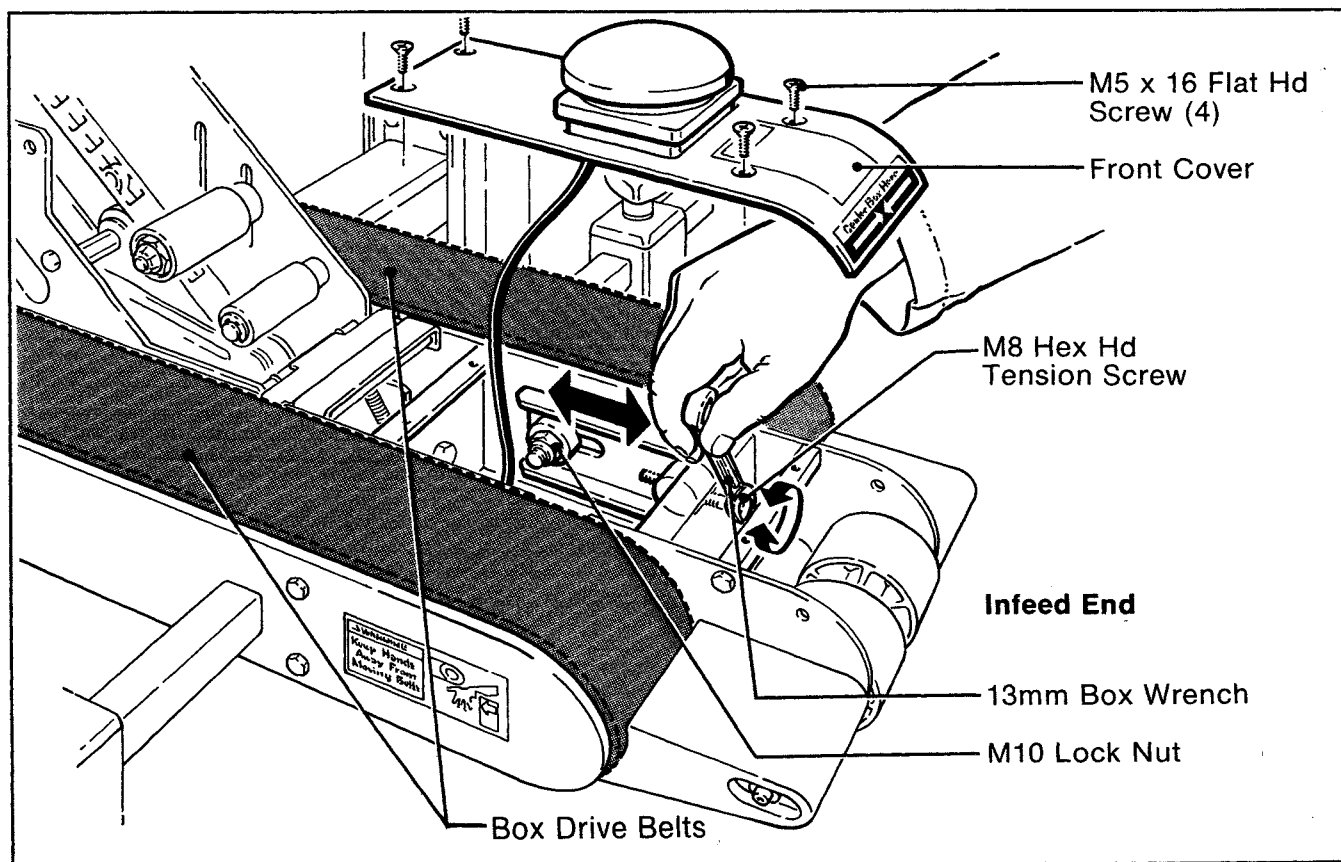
Box Drive Belt Tension Adjustment, Upper Belts (Infeed End)
